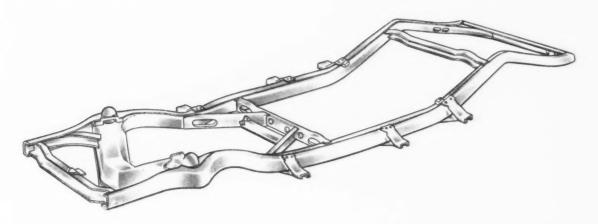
Completed frame assemblies, such as shown above, are twisted and vibrated severely to test the strength of machine welds. Under the terriffic strain, crossmembers will break but welds will not fracture.
